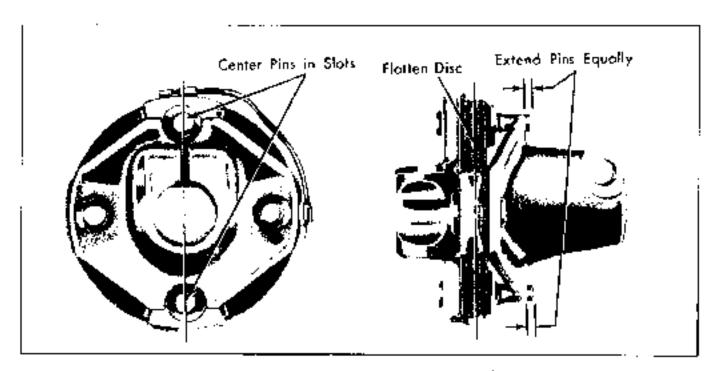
Installing Steening Shoft to Flexible Coupling
